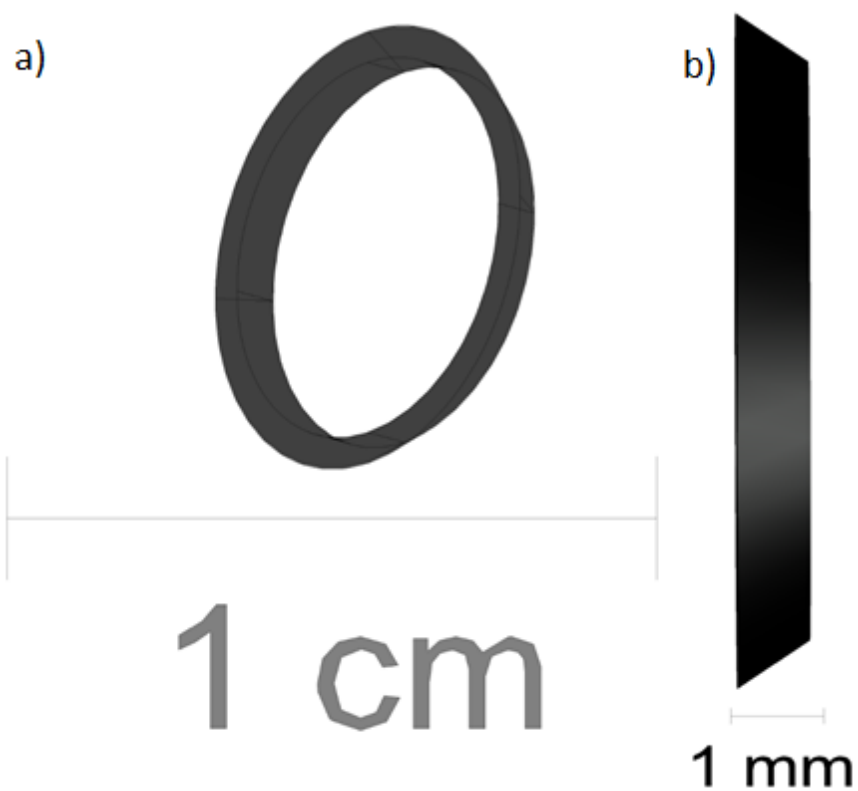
a) O-ring holder; b) O-ring holder, side view. This piece is used to hold the O-ring in place during the measurements. Its height is 75% of the height of the O-ring, so that it does not touch the sample, but the O-ring stays inside it, and itself defines the contact area.
